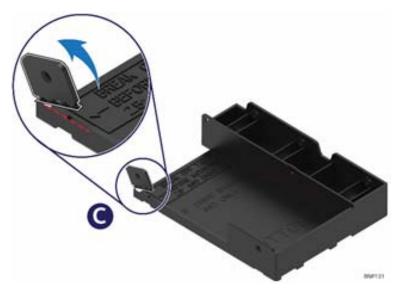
3.5" Drive Carrier to 2.5" SSD Bracket – Tab Removal
